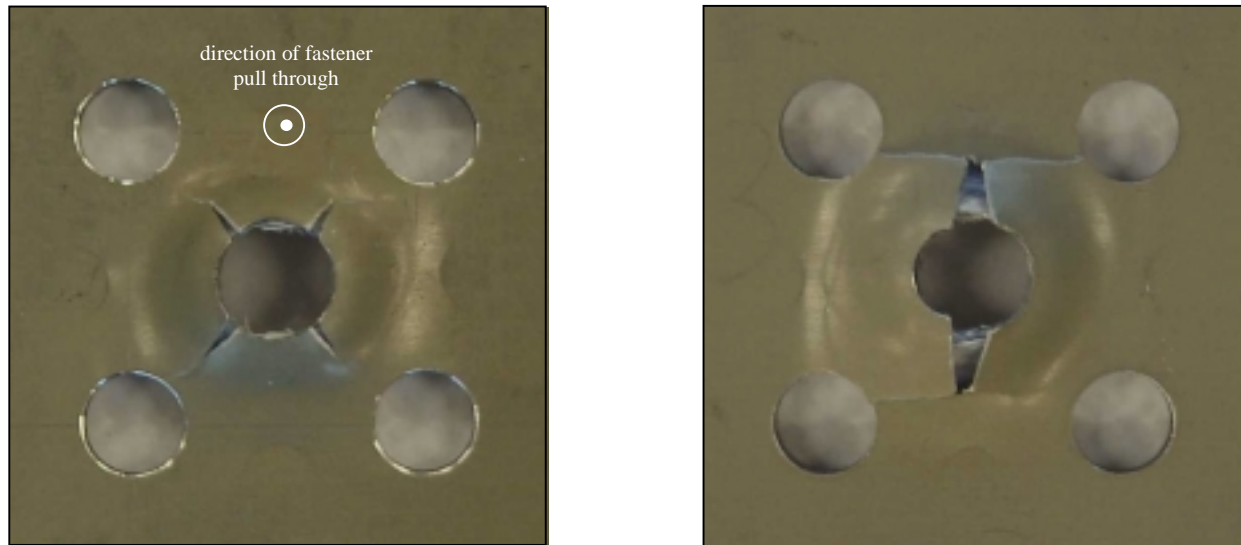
Typical failure of GLARE4A specimen, without cracks (left) and with cracks (right)
